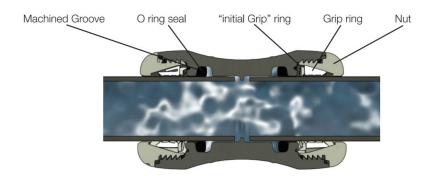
Schematic of a stab fitting design showing inserted pipe (Courtesy of Plasson)
